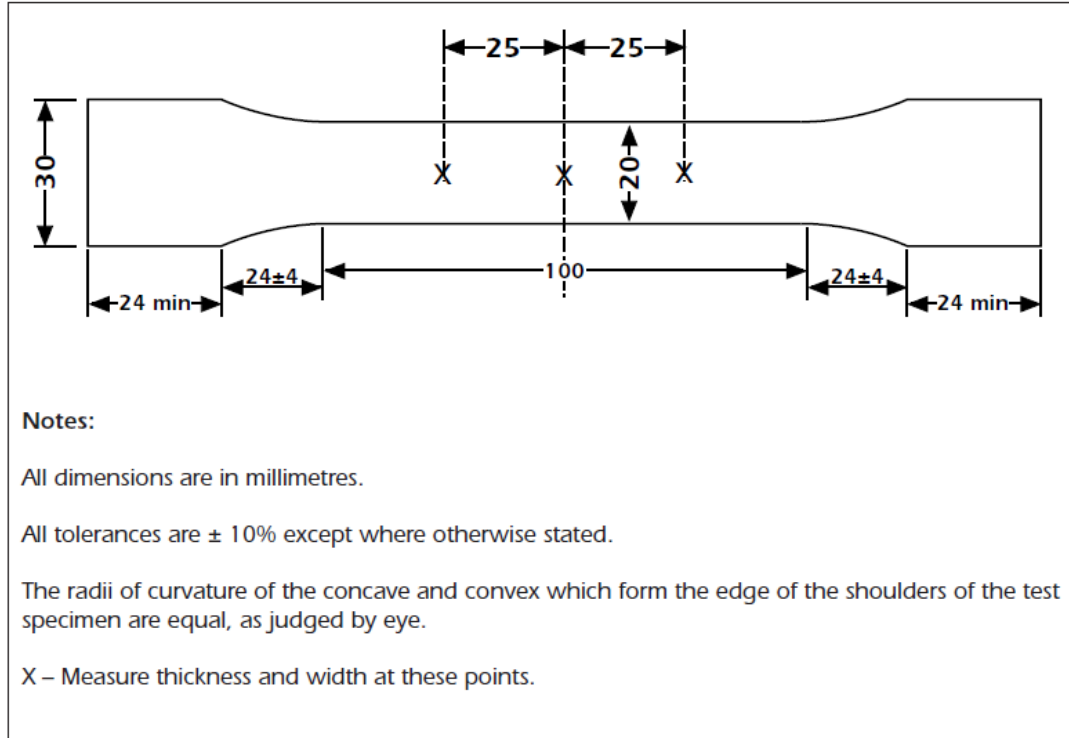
DUMB-BELL SHAPED TEST SPECIMEN
